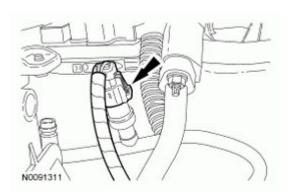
Locating Compressor Suction Tube And Nut Courtesy of FORD MOTOR CO.
